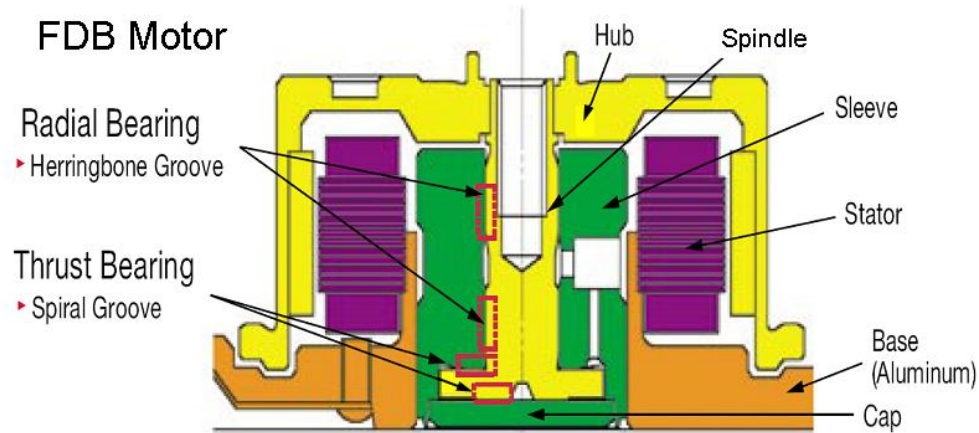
Schematic of fluid dynamic bearing (FDB) spindle motor (source [6, 13])
